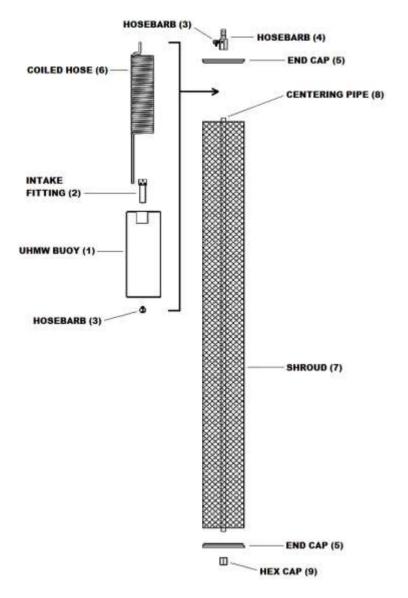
4" High Temperature, Heavy Oil Skimmer Assembly
